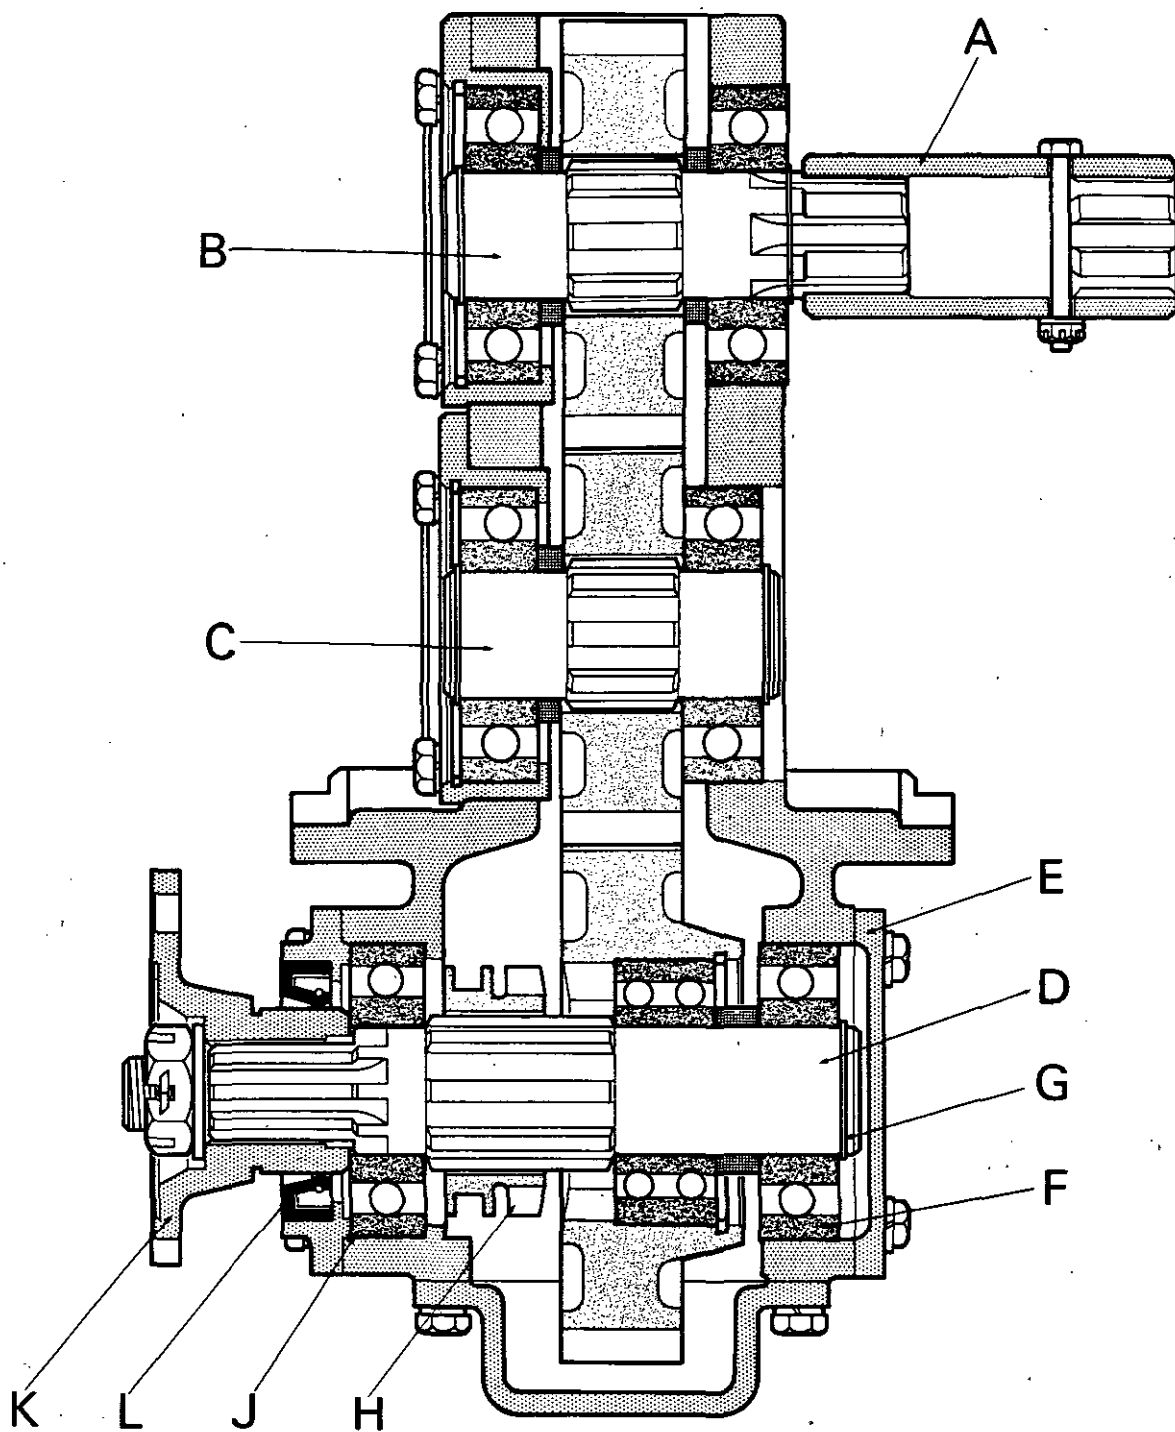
TRANSFER GEARBOX - 1200, 1210 TRACTORS
